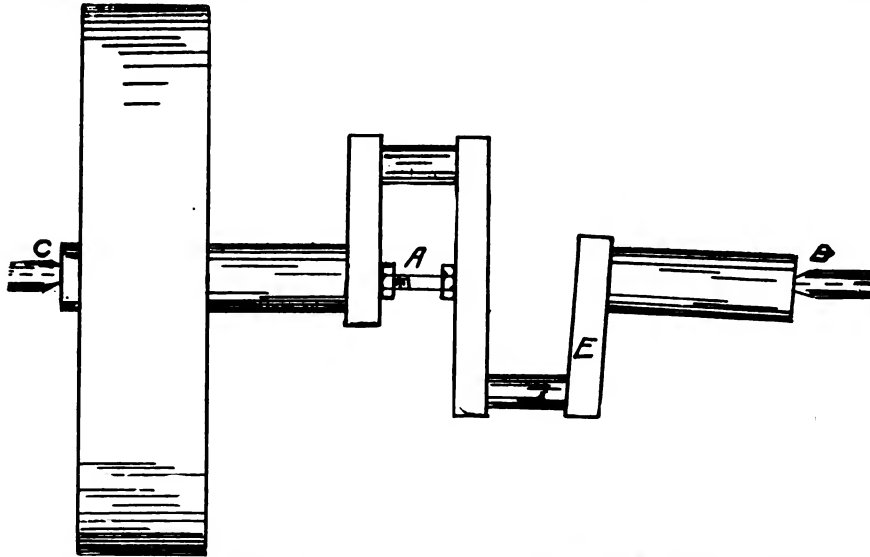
A CRANK SHAFT DISTORTED IN THIS MANNER WILL CAUSE SEIZING OF THE BEARINGS
